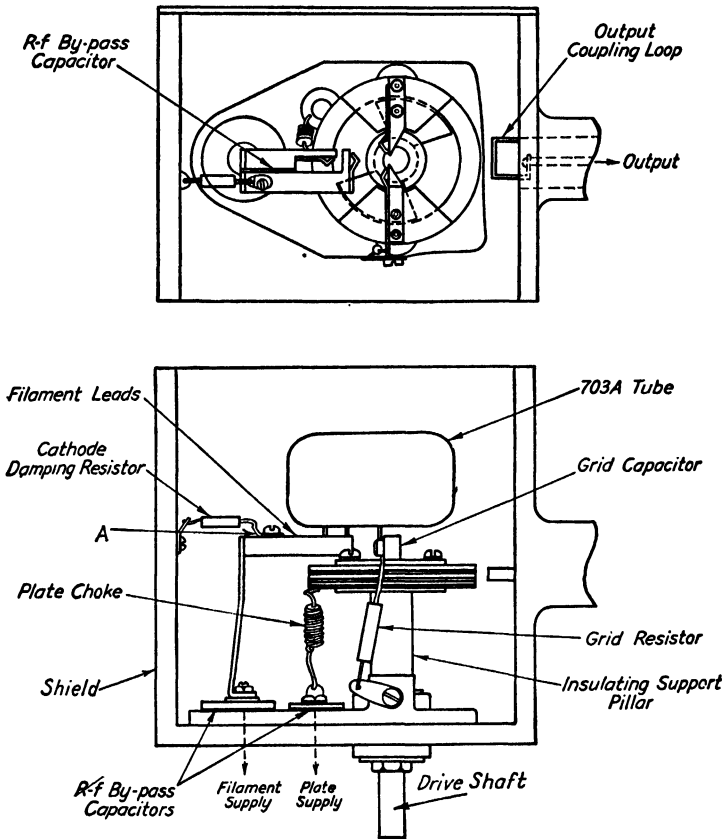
Doorknob oscillator assembly (tube removed in the upper view).
